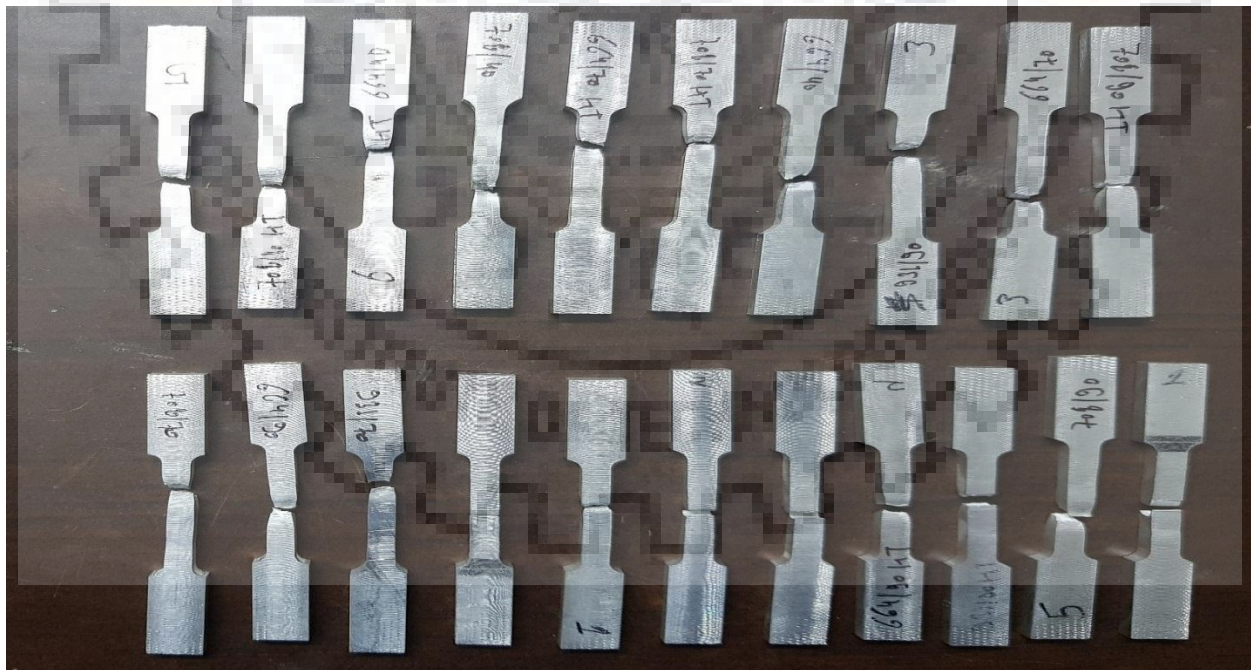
Tensile samples of weld joint (after testing)
